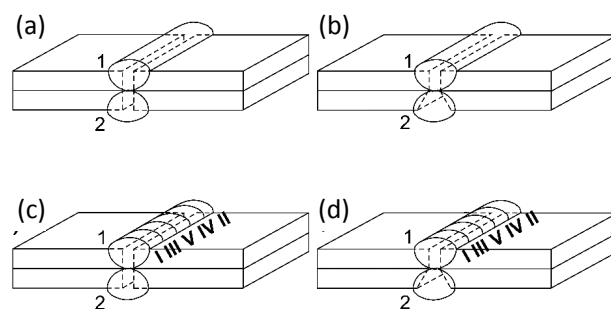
Butt welds: (a) specimen 1 and 5, (b) specimen 2 and 6, (c) specimen 3 and 7 and (d) specimen 4 and 8
